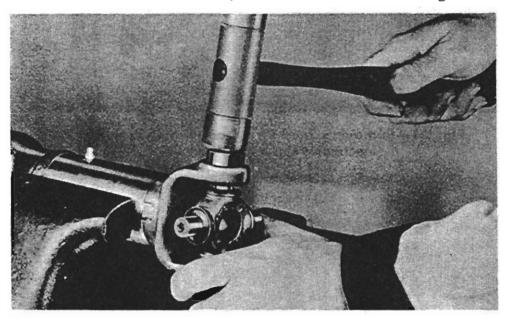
Forcing the Round Type Bearing Retainers Into Position with a Soft Hammer.
